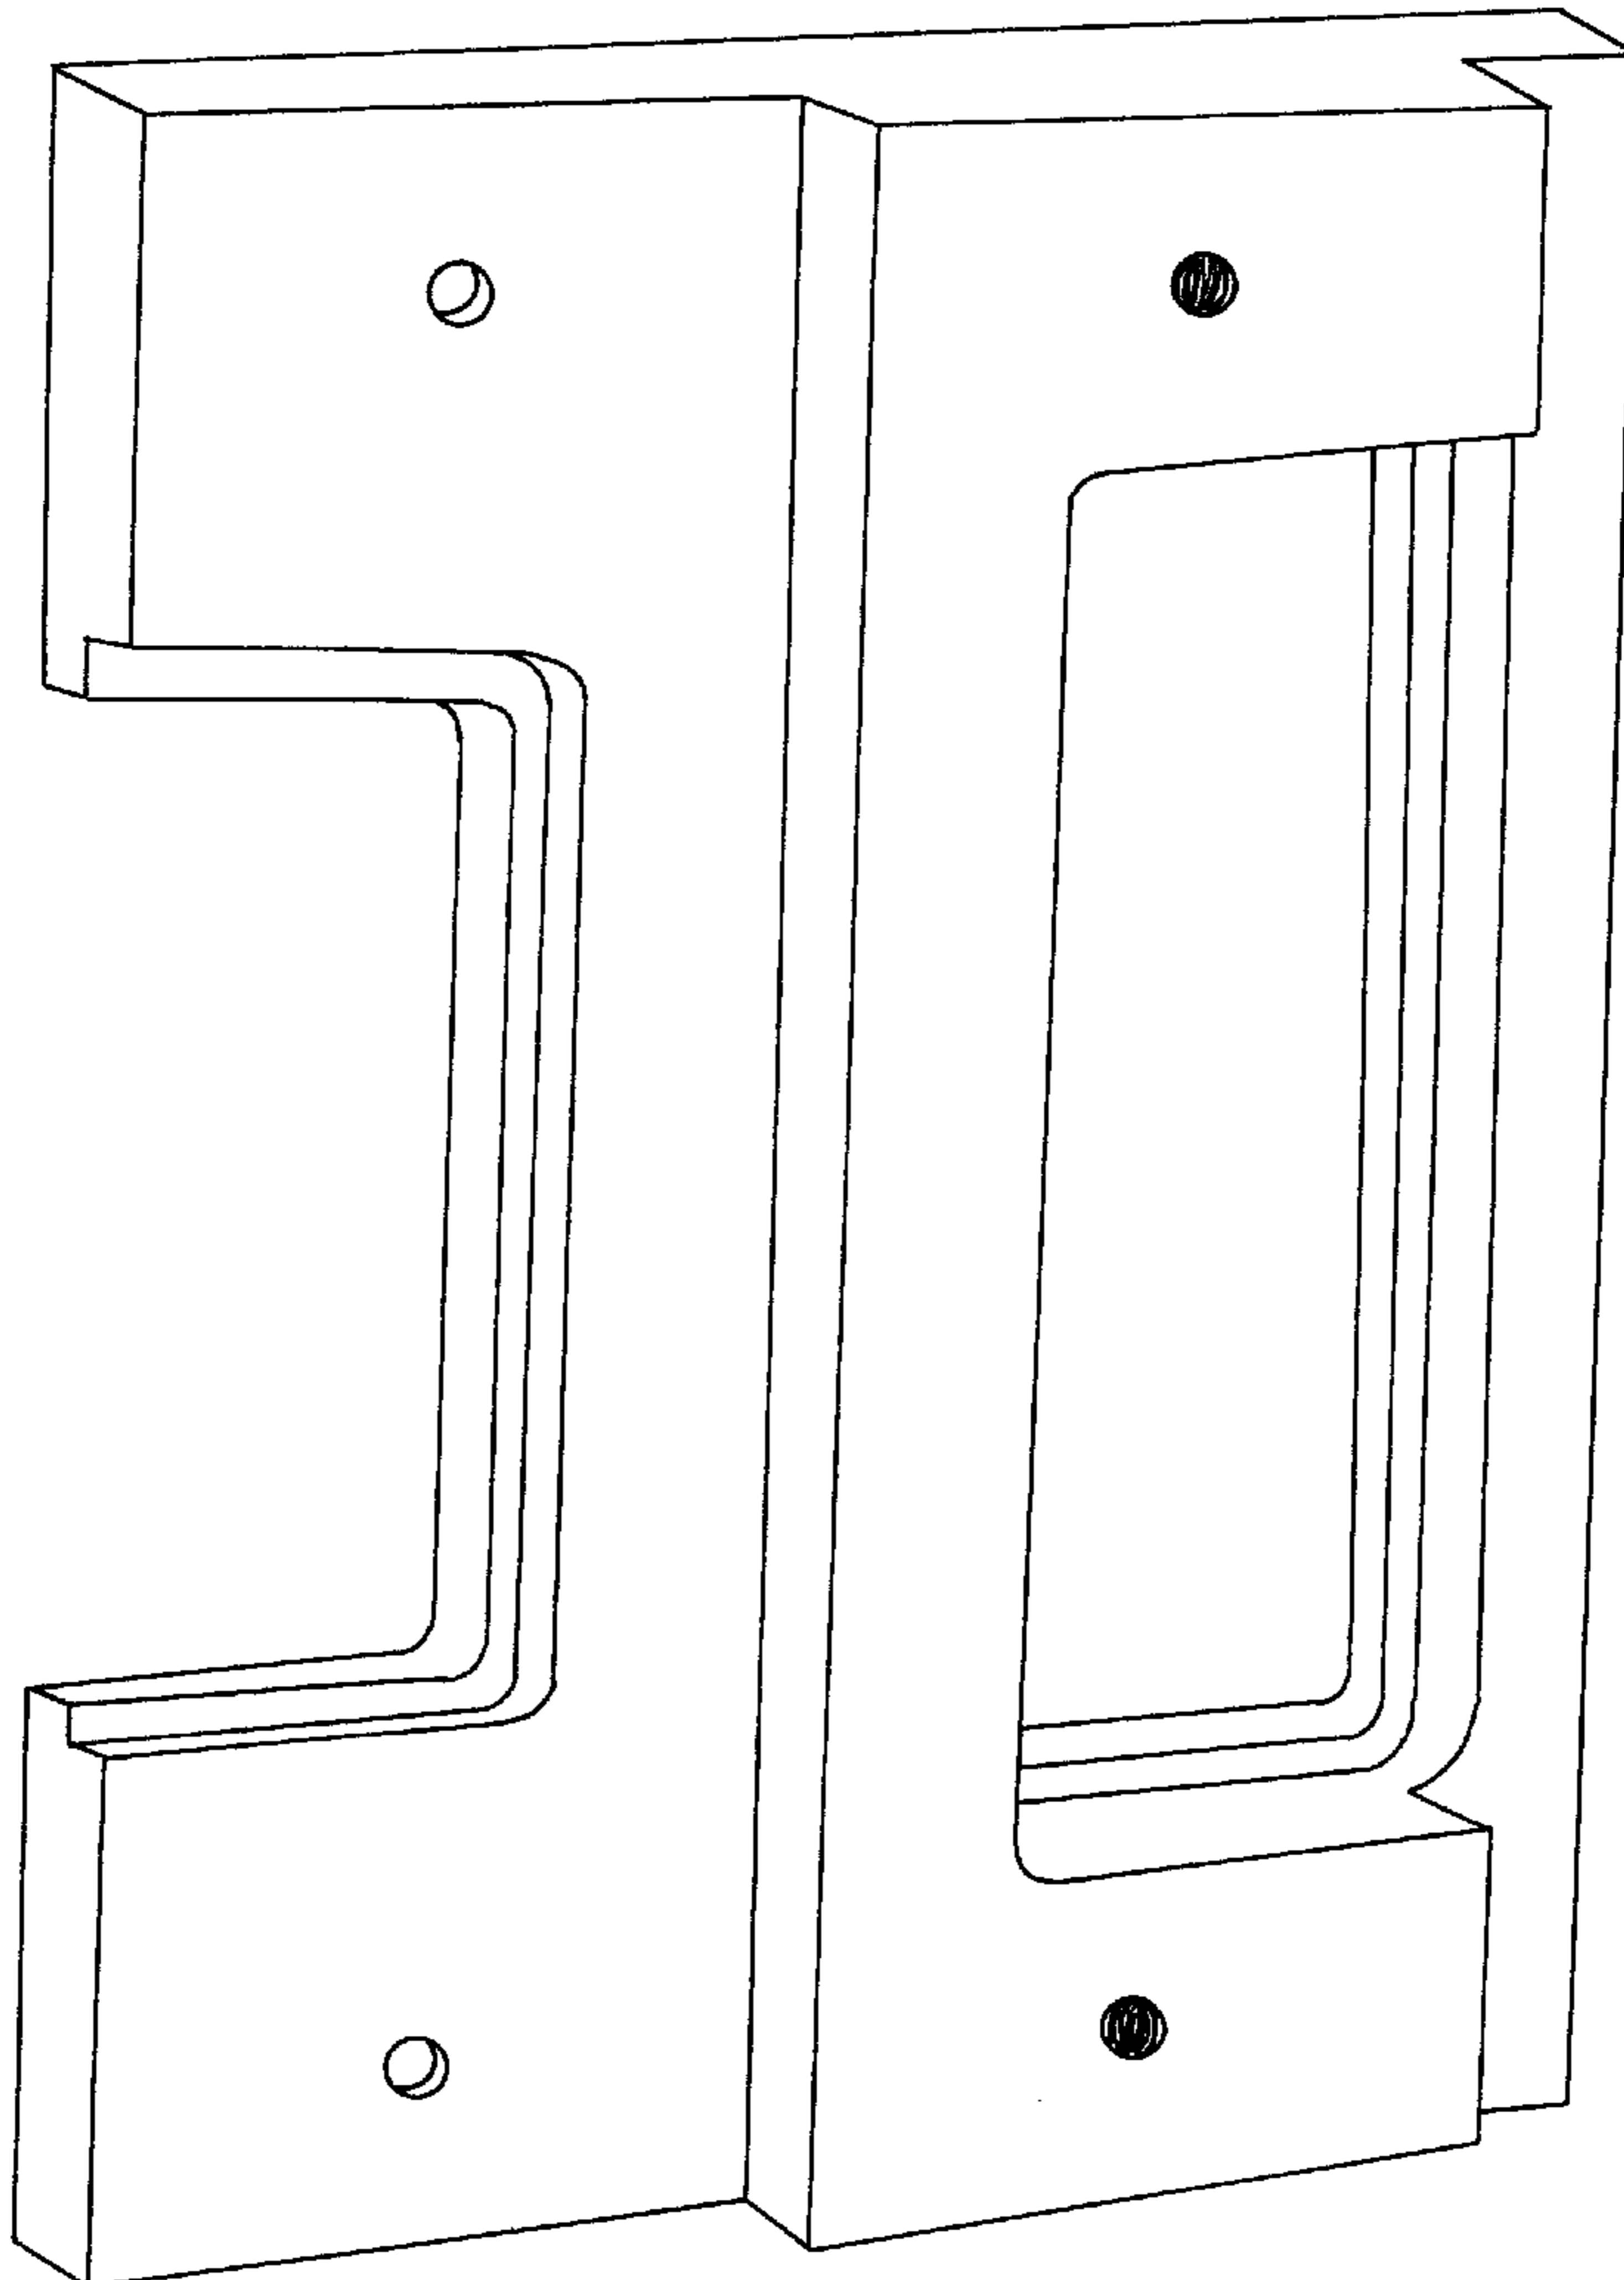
is a right side view of the jamb switch jig for morticing a door jamb switch;
